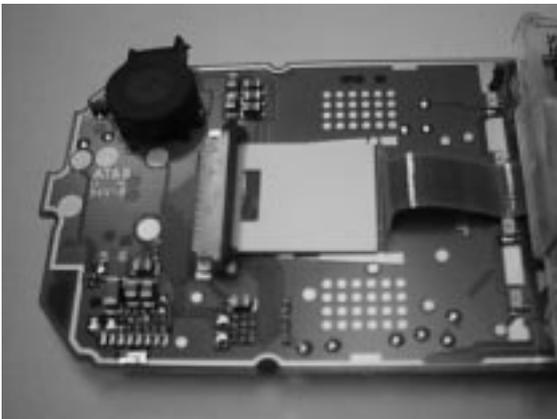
Disassemble Control Board Assy – STEP 2
